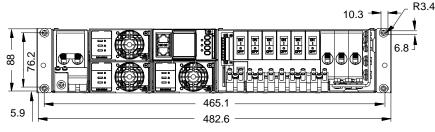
Installation size of NetSure 531 A32-S1 (unit: mm)
